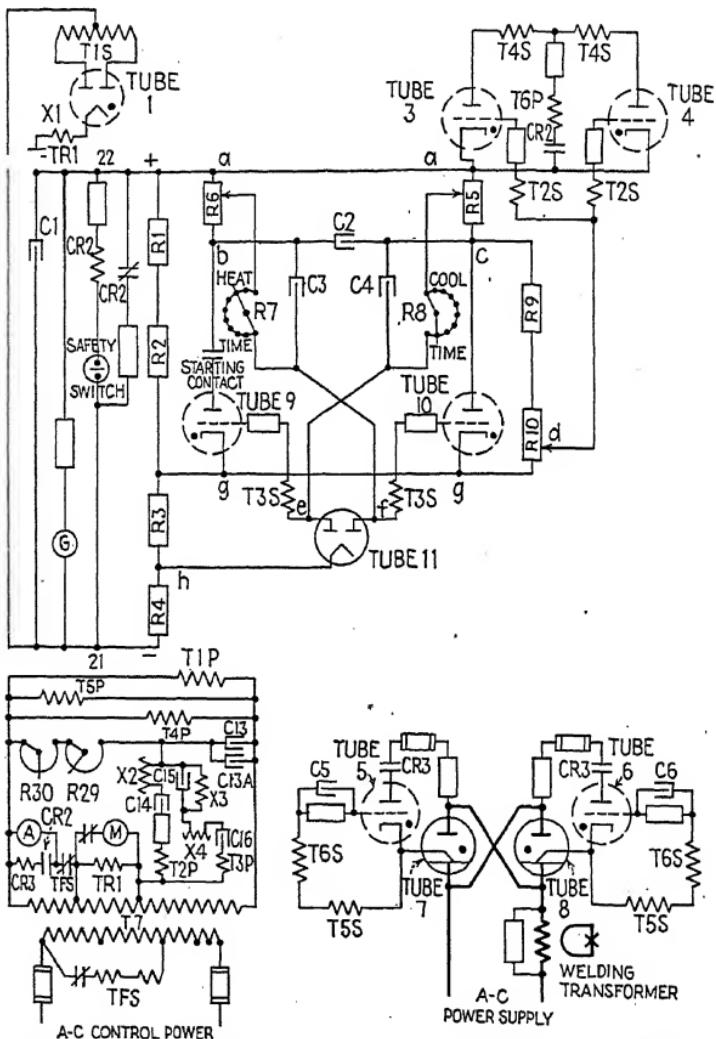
I.—Elementary diagram of CR7503-B110 all-tube seam-welding control.
